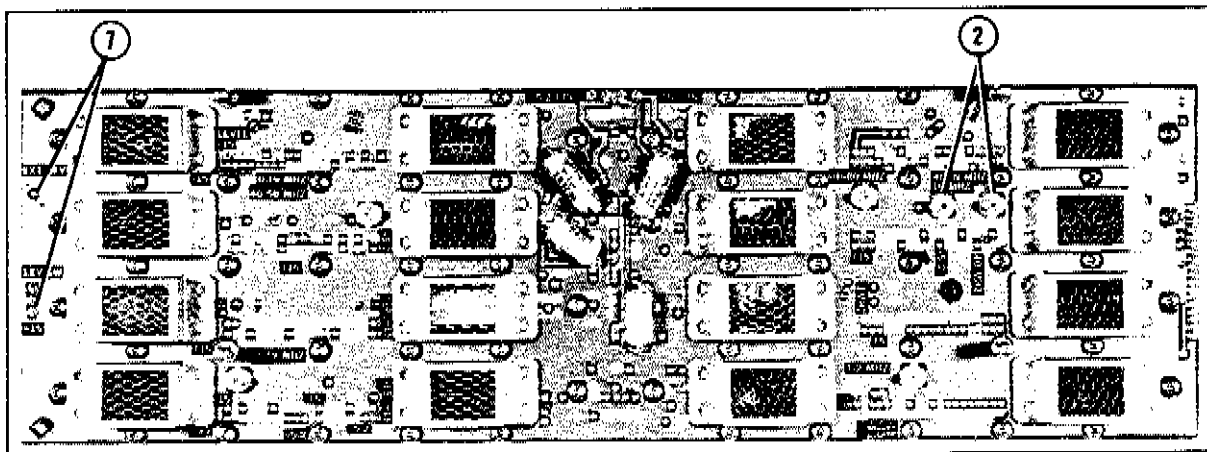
O-4. Mother Board Locations for Set-Up Procedure.
